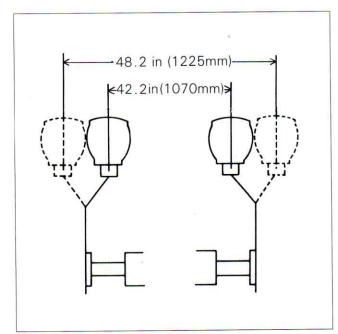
Rear Wheel Tread Settings (9.5×24 Tires)
